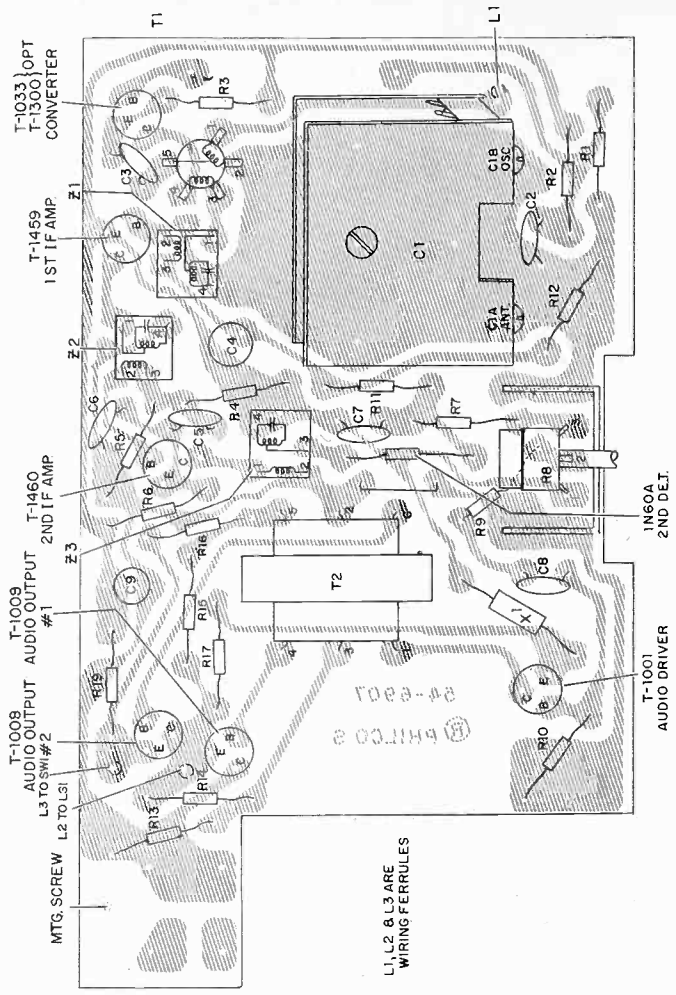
Component Panel Top View — Showing Parts Location and Tuning Adjustments
